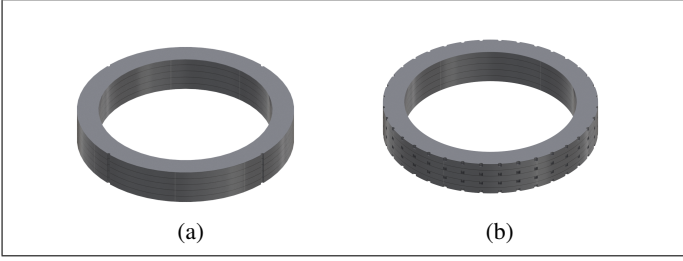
(a) Line-weld sample and (b) Spot-weld sample.
